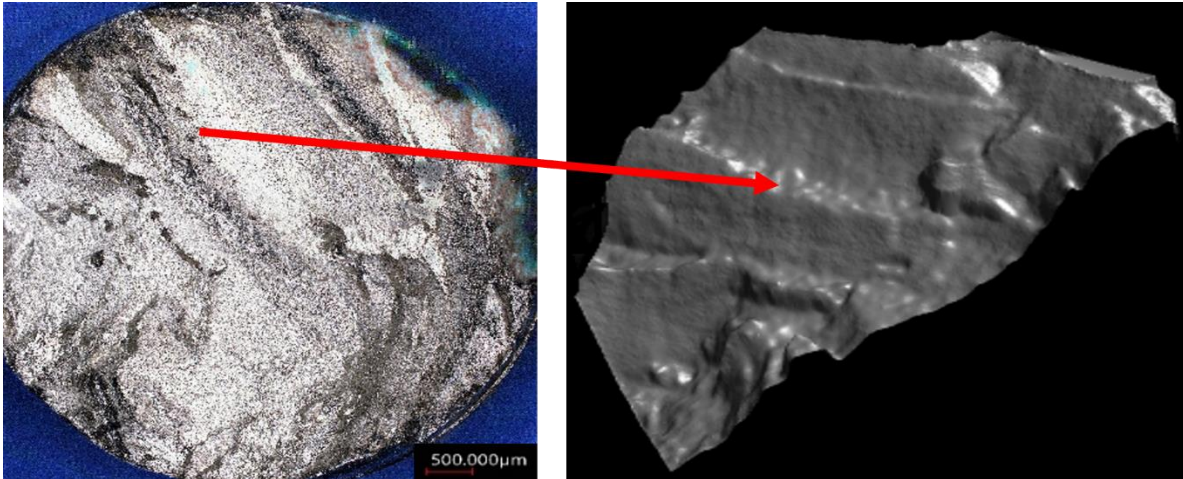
The fracture surface of the X 6061-T6 #9 (left) and the 3D rendering of the surface (right) showing steps on the surface.
